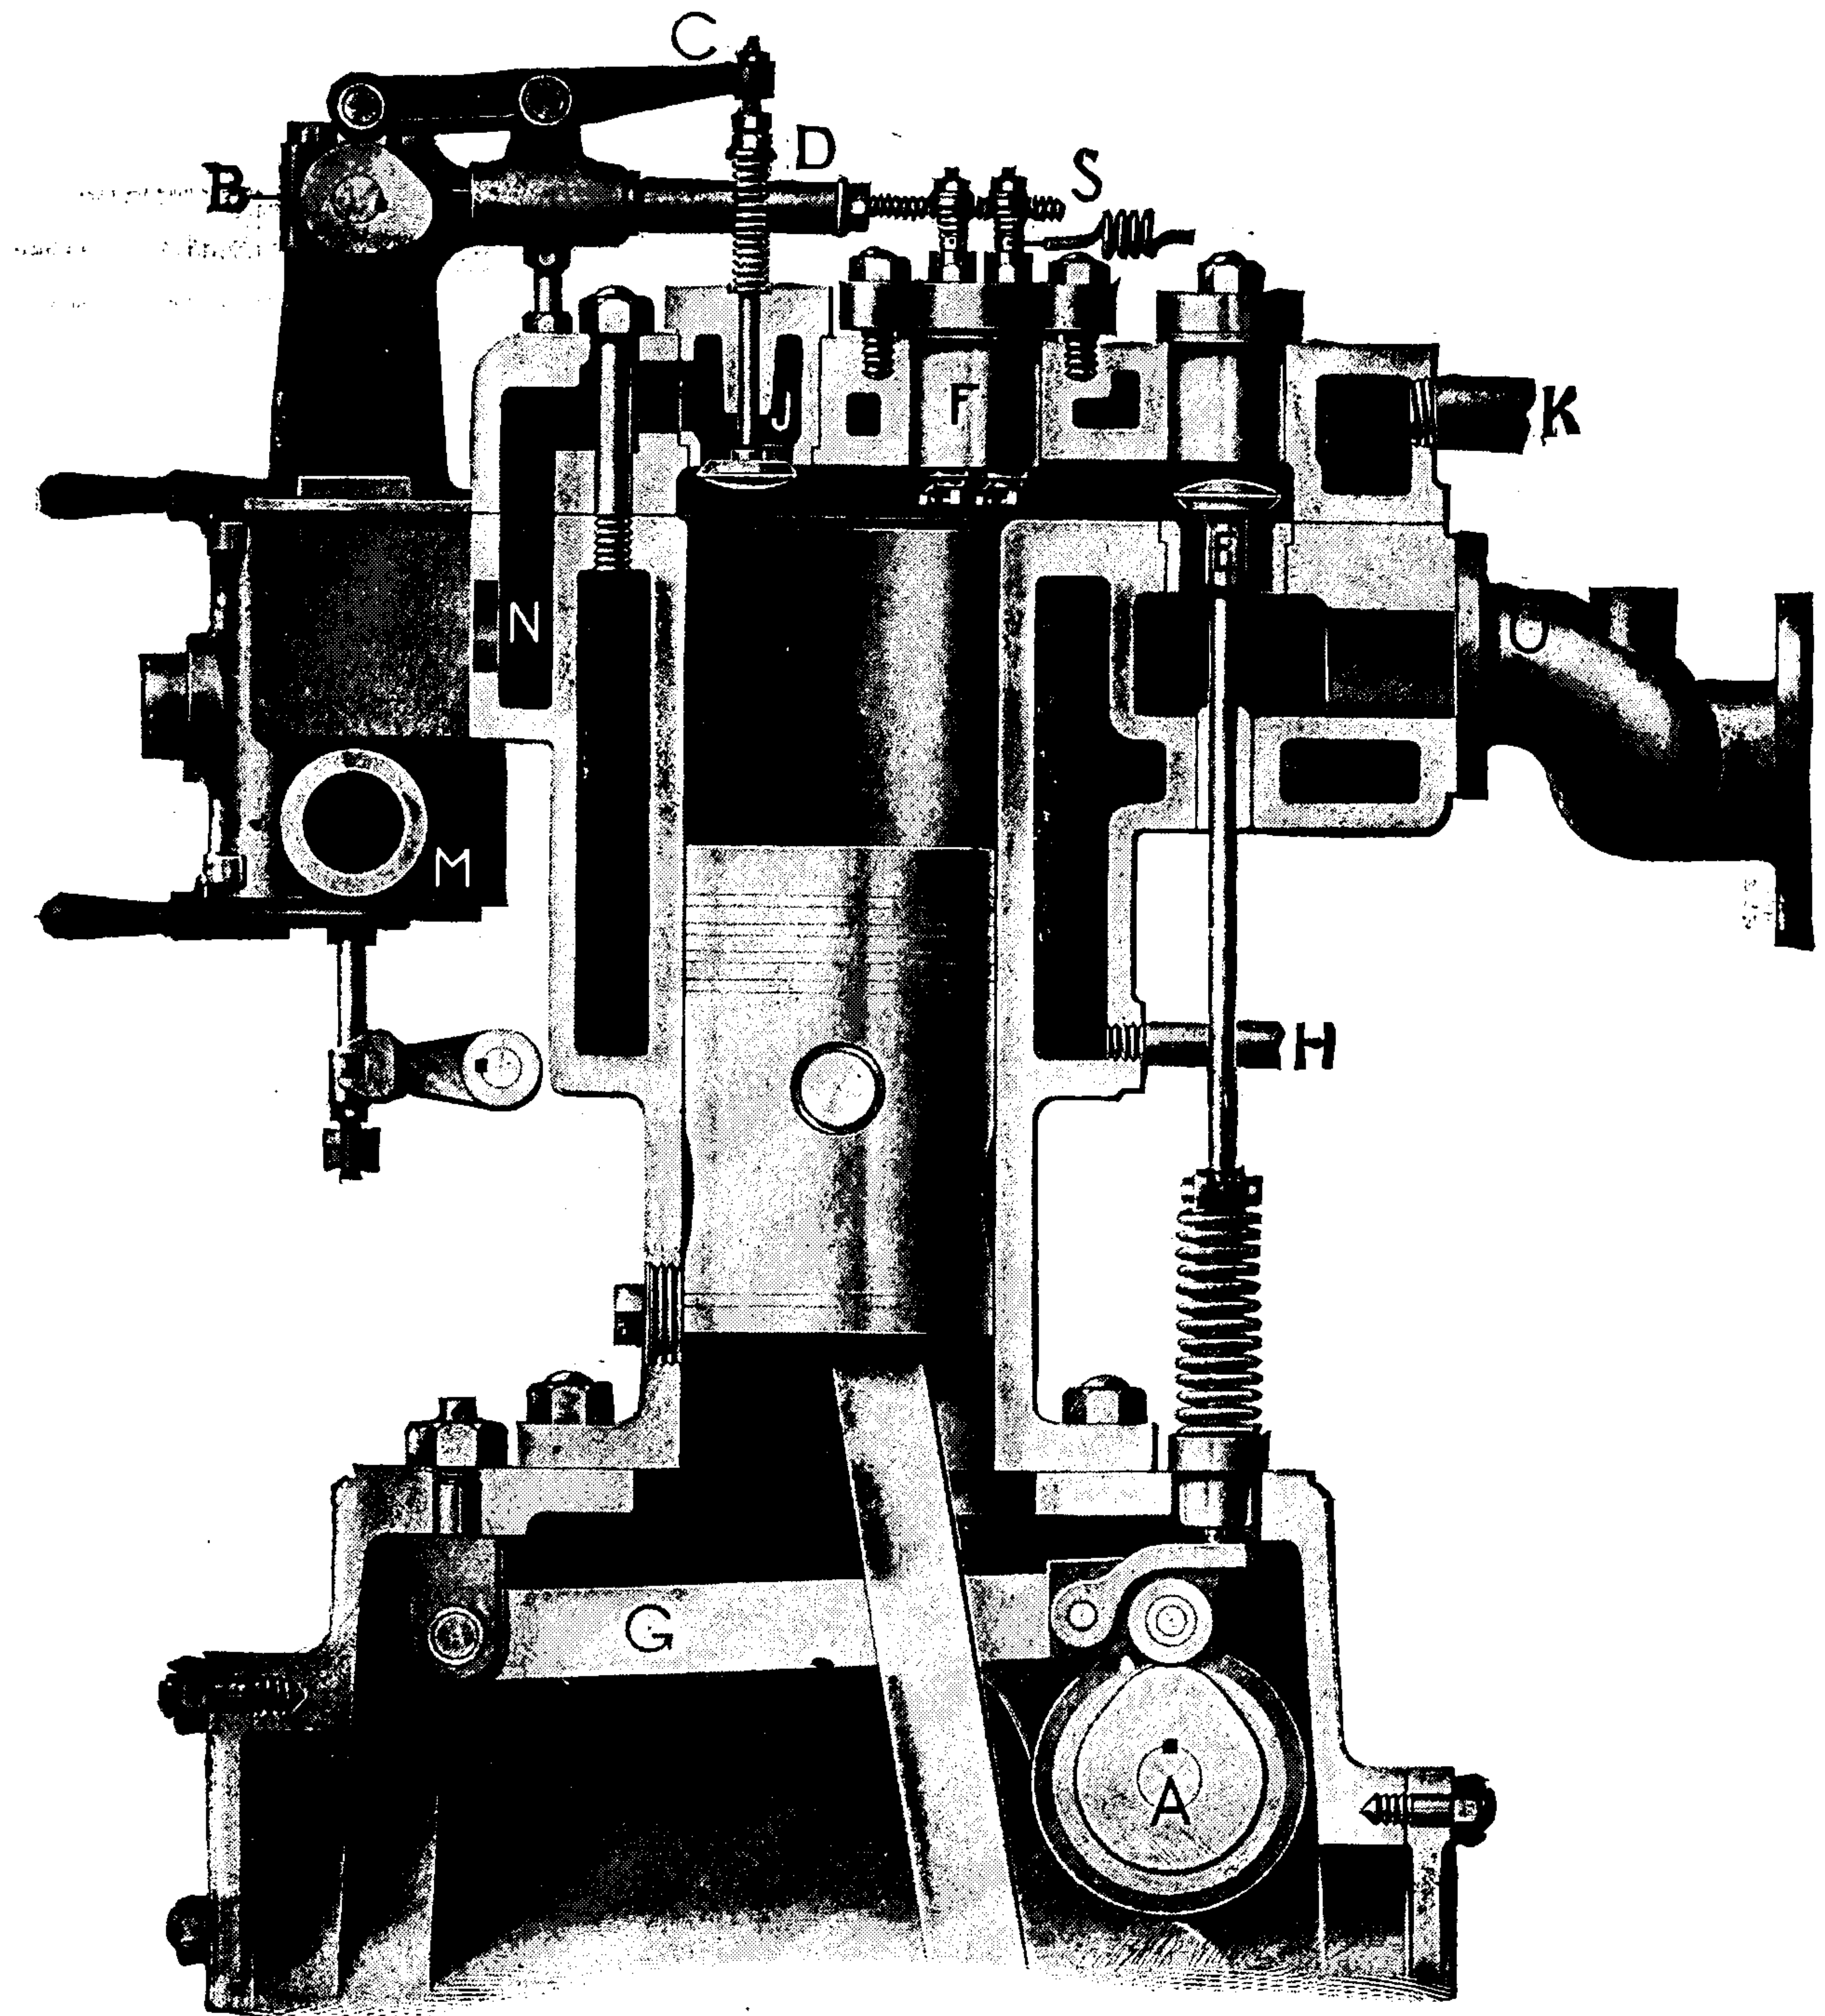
SECTIONAL ELEVATION OF THE WESTINGHOUSE.
